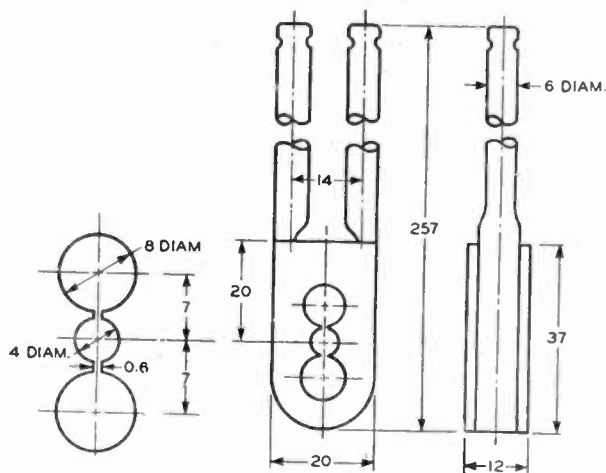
Double-cavity anode of a 9.9-centimeter magnetron. All dimensions are in millimeters.
